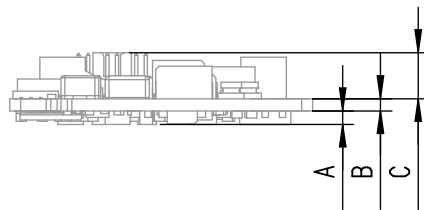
Mechanical Dimensions ETK-S4.2B: Microcontroller with Socket Adapter mounted
